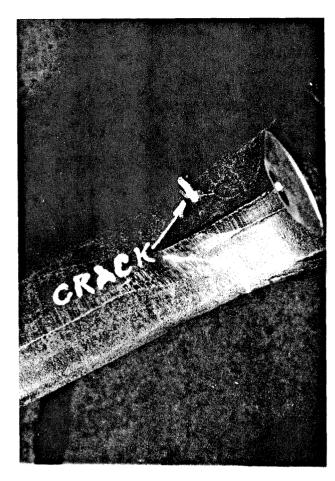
Connecting rod which cracked in service, but which was detected before fracture occurred.
